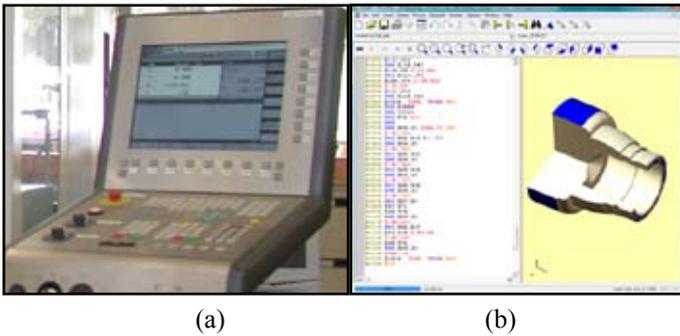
(a) CNC machine (b) Computer Aided Program written for the design certain part of a tool.
